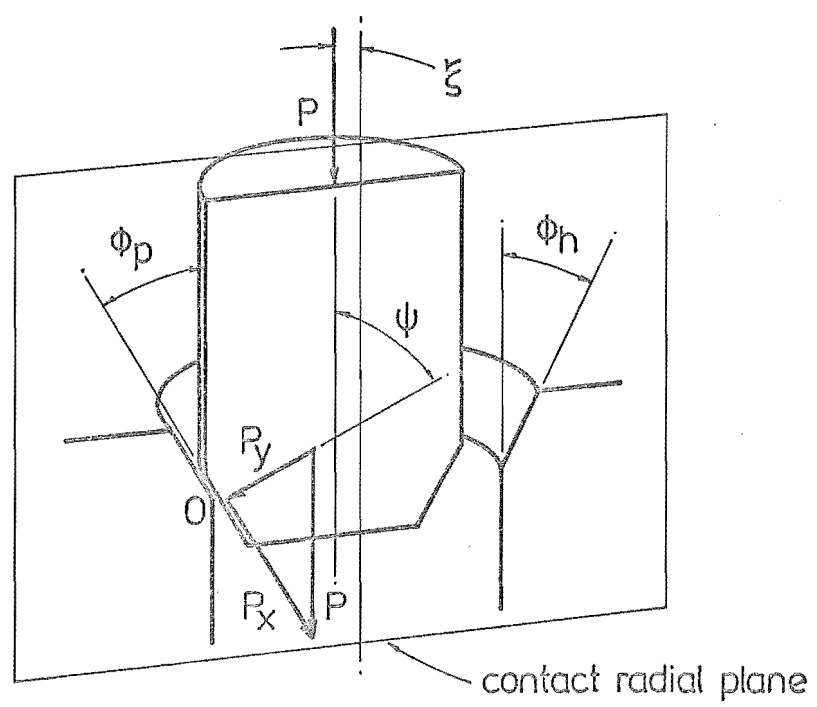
PEG CHAMFER FACE / HOLE CHAMFER FACE
